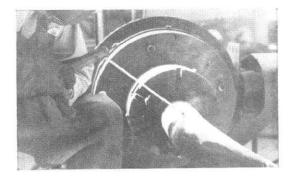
Qualification of welding procedures and welding operators $\left(\begin{array}{c} & \\ & \\ & \end{array} \right)$
